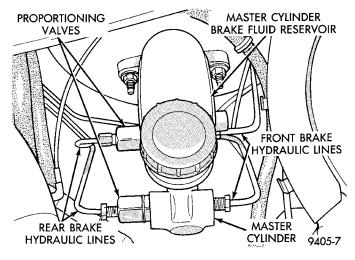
Master Cylinder For Non Anti-Lock Brake Equipped Vehicles
